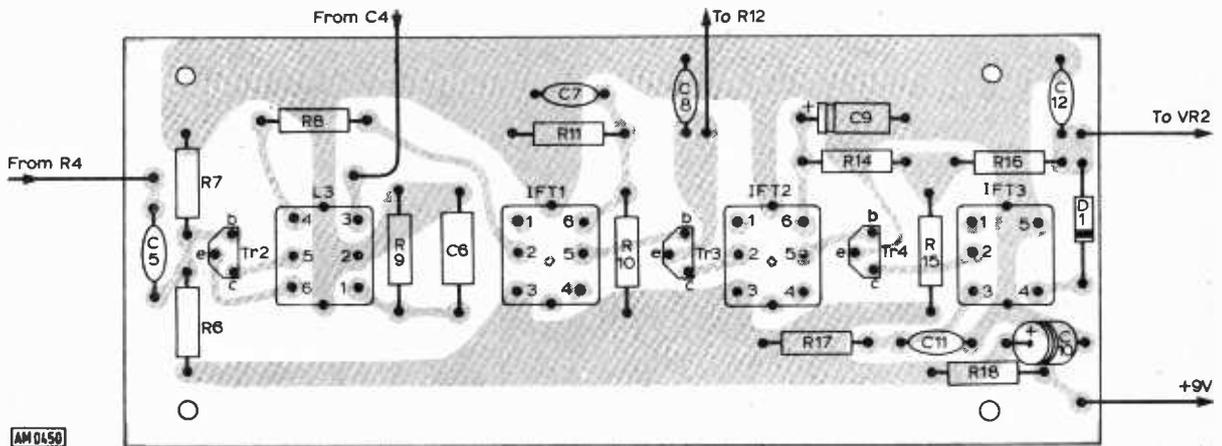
Foil side and component side views of the Osc/IF board. Both are shown full size. If the board is to be tested outside the receiver, VR2 must be connected
